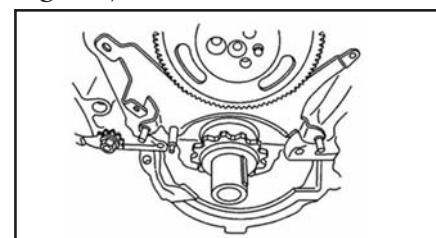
GM 4.3L lower bracket holes will line up with front cover alignment holes.
